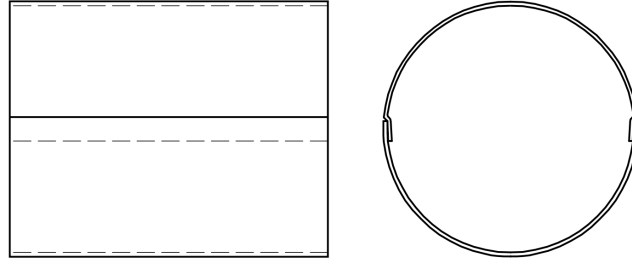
Longitudinal single-lap connection of fuselage sections. From Kim et al. [63].
